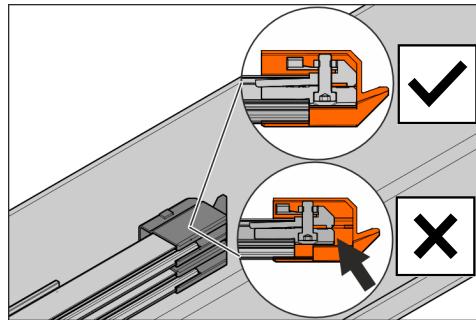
Check the seating of the end caps and check that the power feed terminal and end cap are firmly seated.
